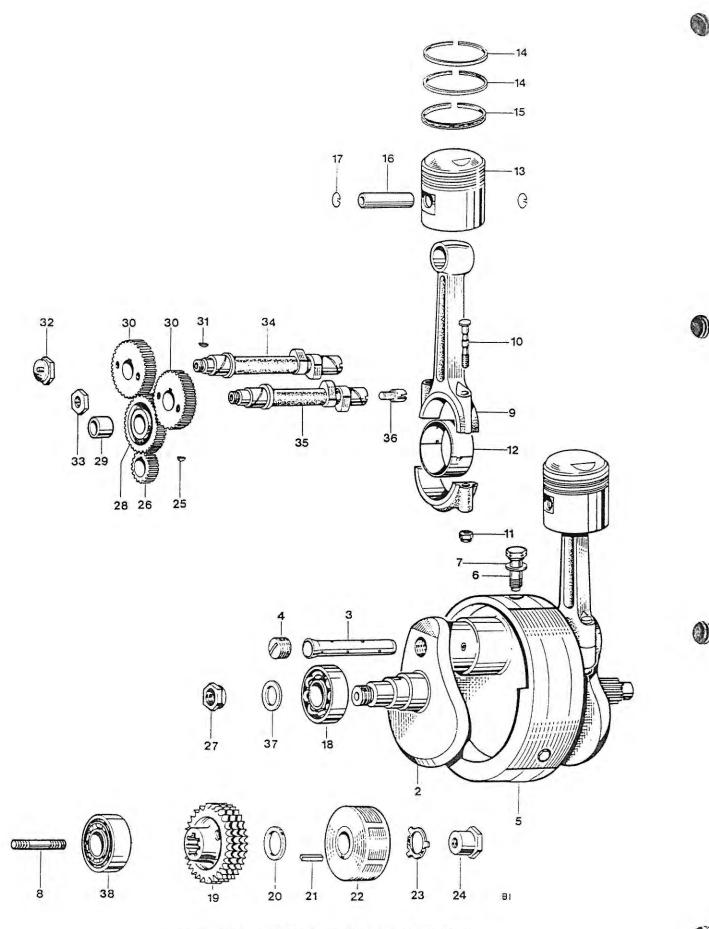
CRANKSHAFT AND CONNECTING RODS
